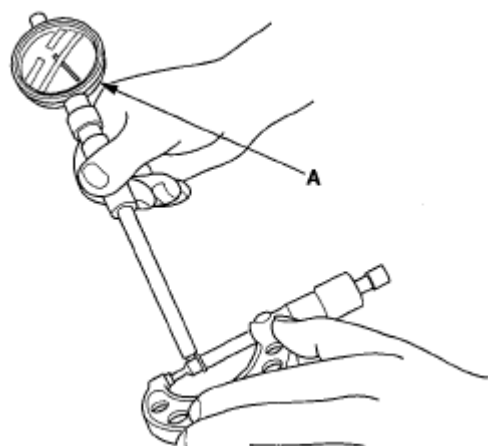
Identifying Zero Gauge To Shaft Diameter
